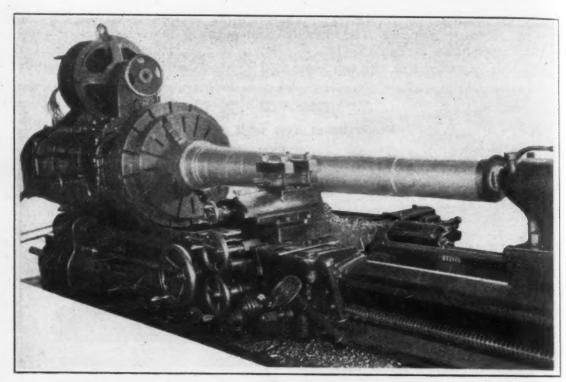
Type of lathe and tool holder used in the cutting tests described.
